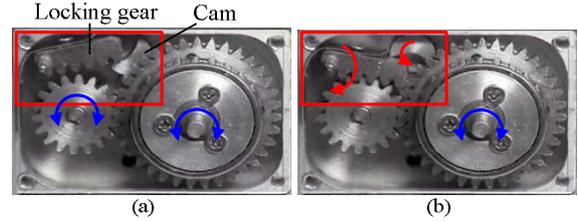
Clutch mechanism; (a) released, and (b) locked.
